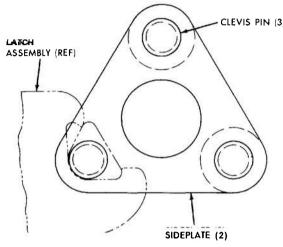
PARACHUTE CONNECTOR LINK ASSEMBLY
